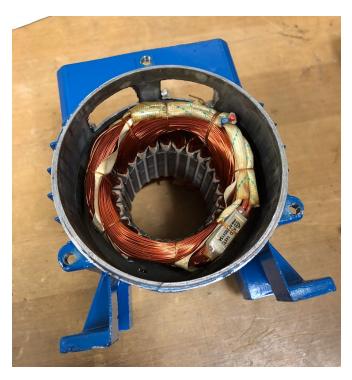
Inside of Pump Housing Prior to Removal of Inner Magnetic Components
